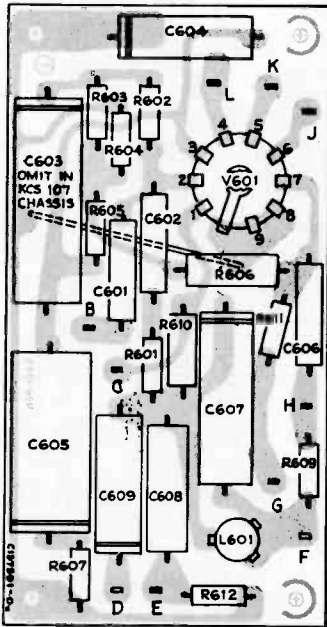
PW600—Horizontal Oscillator Assembly Layout
